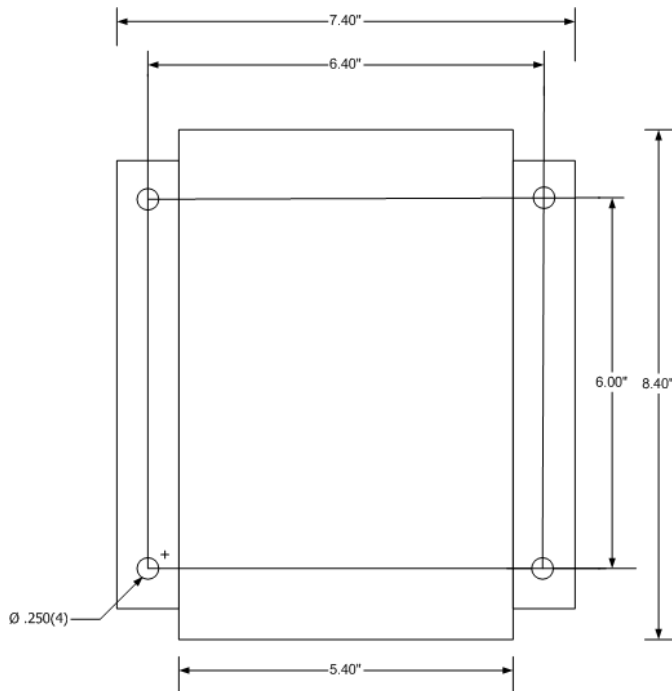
NeXGen RTU Baseplate Mounting Detail
